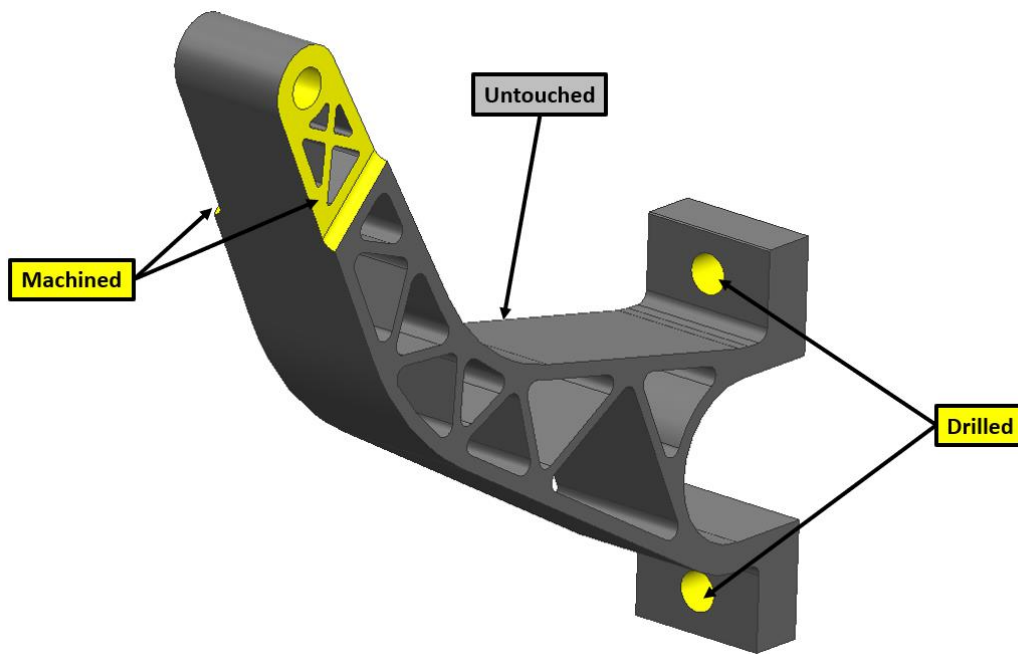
Front-rear member after post-machining, with machined areas in yellow
